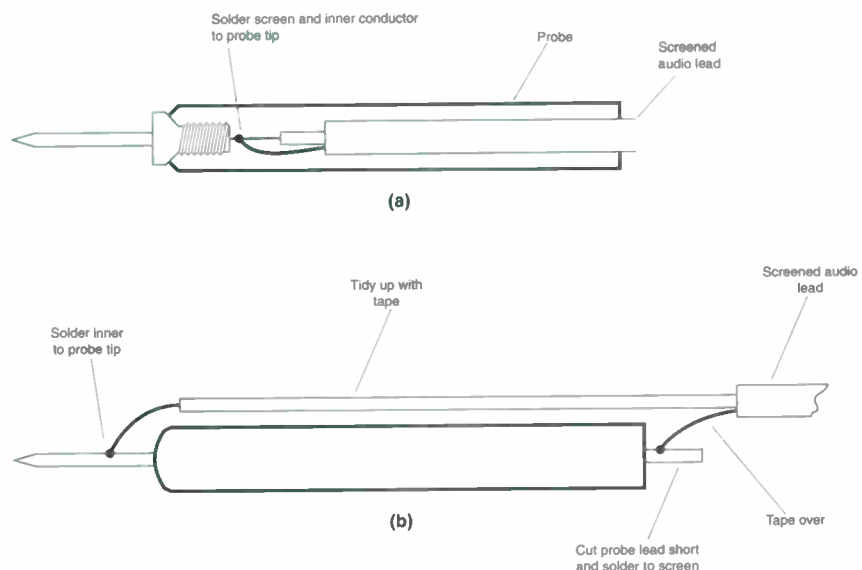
(a) Connections to a solder-type probe. (b) How the test lead can be connected to a moulded test probe. File the coating away for the solder to take.
